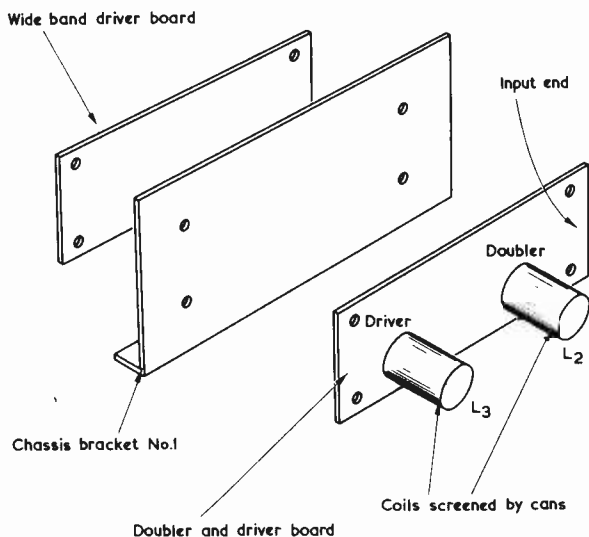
The doubler and driver board is mounted on Chassis Bracket No. 1 on the opposite side to the wideband driver board
